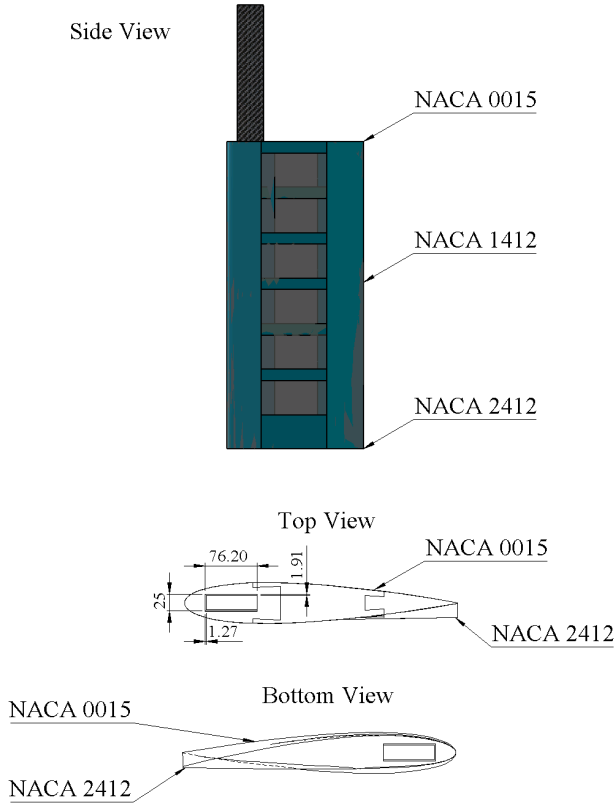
Foil technical drawing showing the different section shapes and the principal dimensions. All the dimensions shown are in millimetres.
